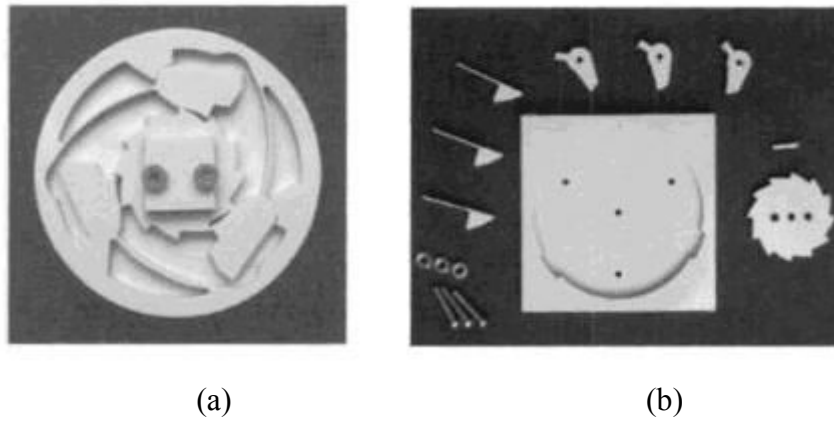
(a) Compliant running clutch (b) Disassembled rigid body mechanism [2]
